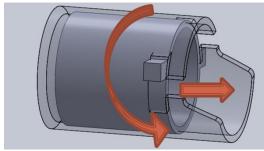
Design idea for sampling container and retaining system using a turning locking mechanism.
